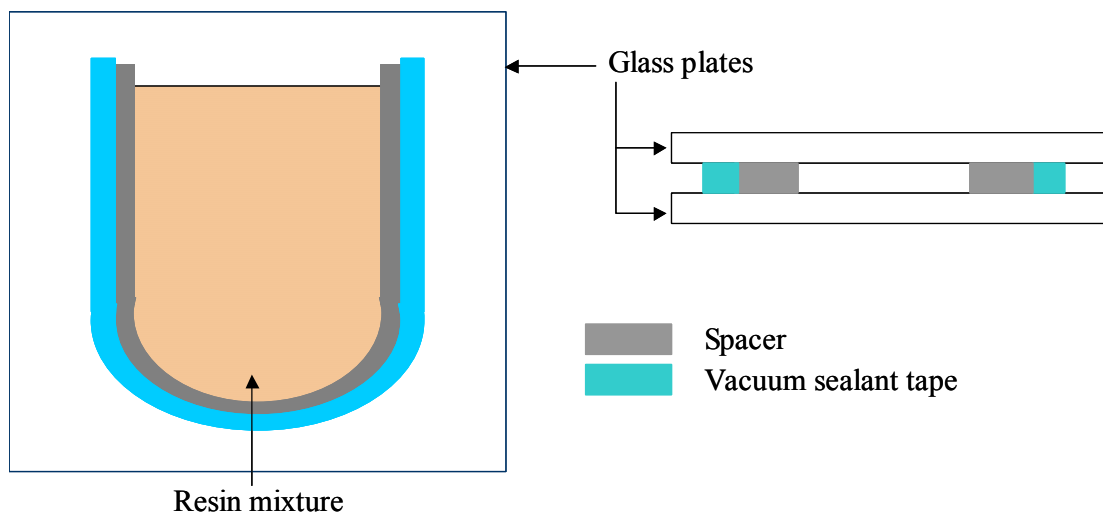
Schematic diagram of mould plates used for casting resin plaques.
